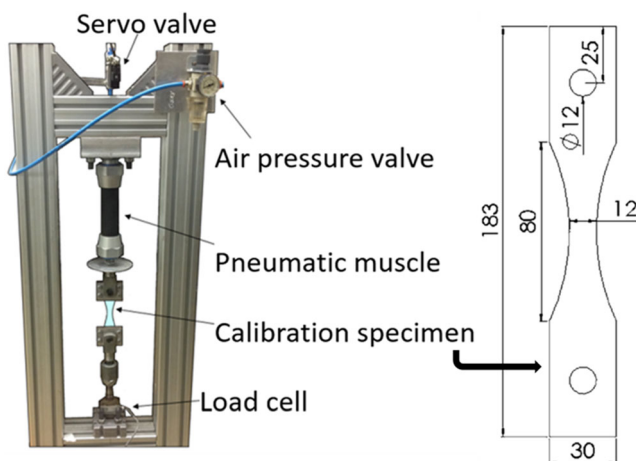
Cyclic pneumatic machine and calibration tensile specimen (dimensions in mm); specimen thickness = 3.9 mm
